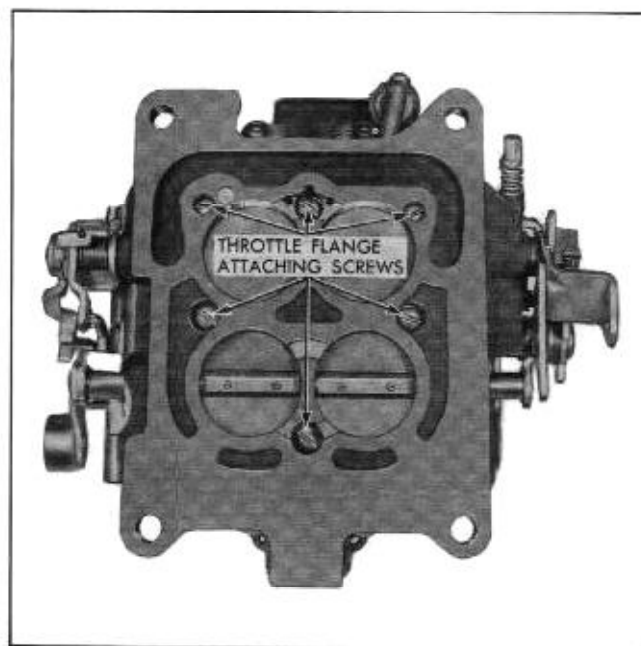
B-15 Location of Throttle Flange Attaching Screws
